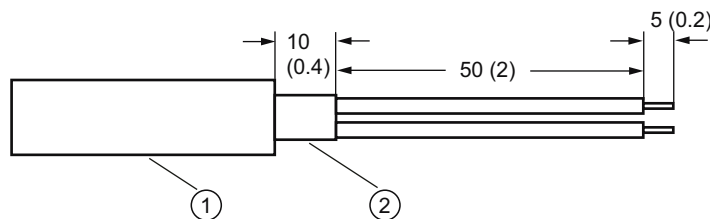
PROFIBUS cable, dimensions in mm (inches)
